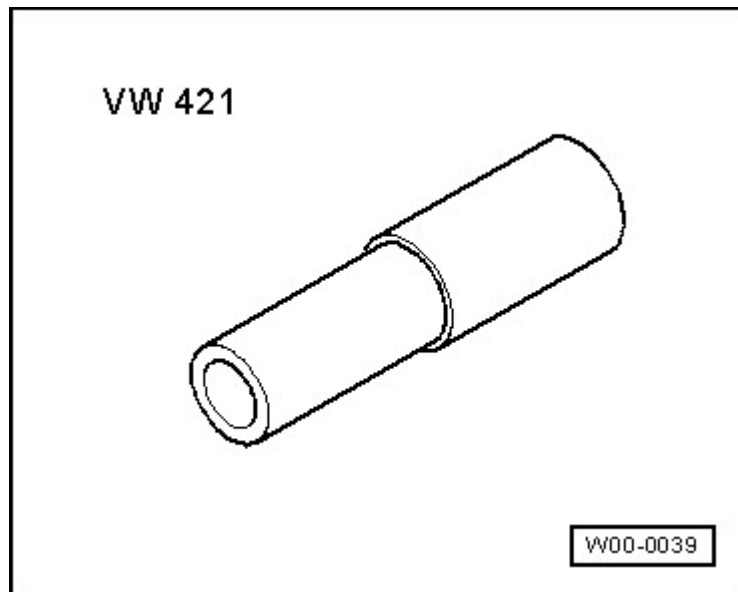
Identifying Tube 28 mm Dia. 100 mm VW 421
